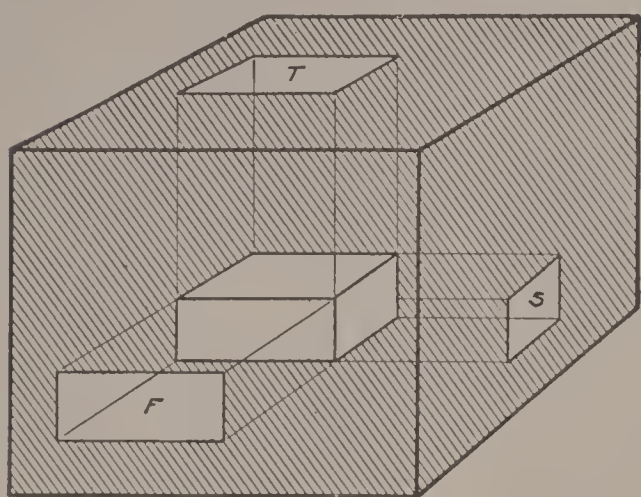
Rectangular Block Within a Glass Box, the Surfaces Projected to the Top, Front, and Right-Hand Side
